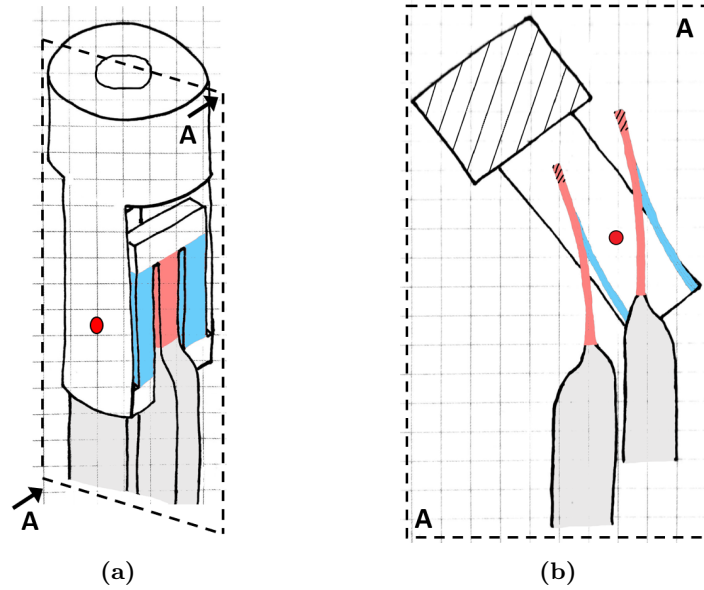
Hand sketches of zero-radius bending concept, with the single axis of rotation indicated by the red dot. a) 3D sketch. b) cross-section during bending.
